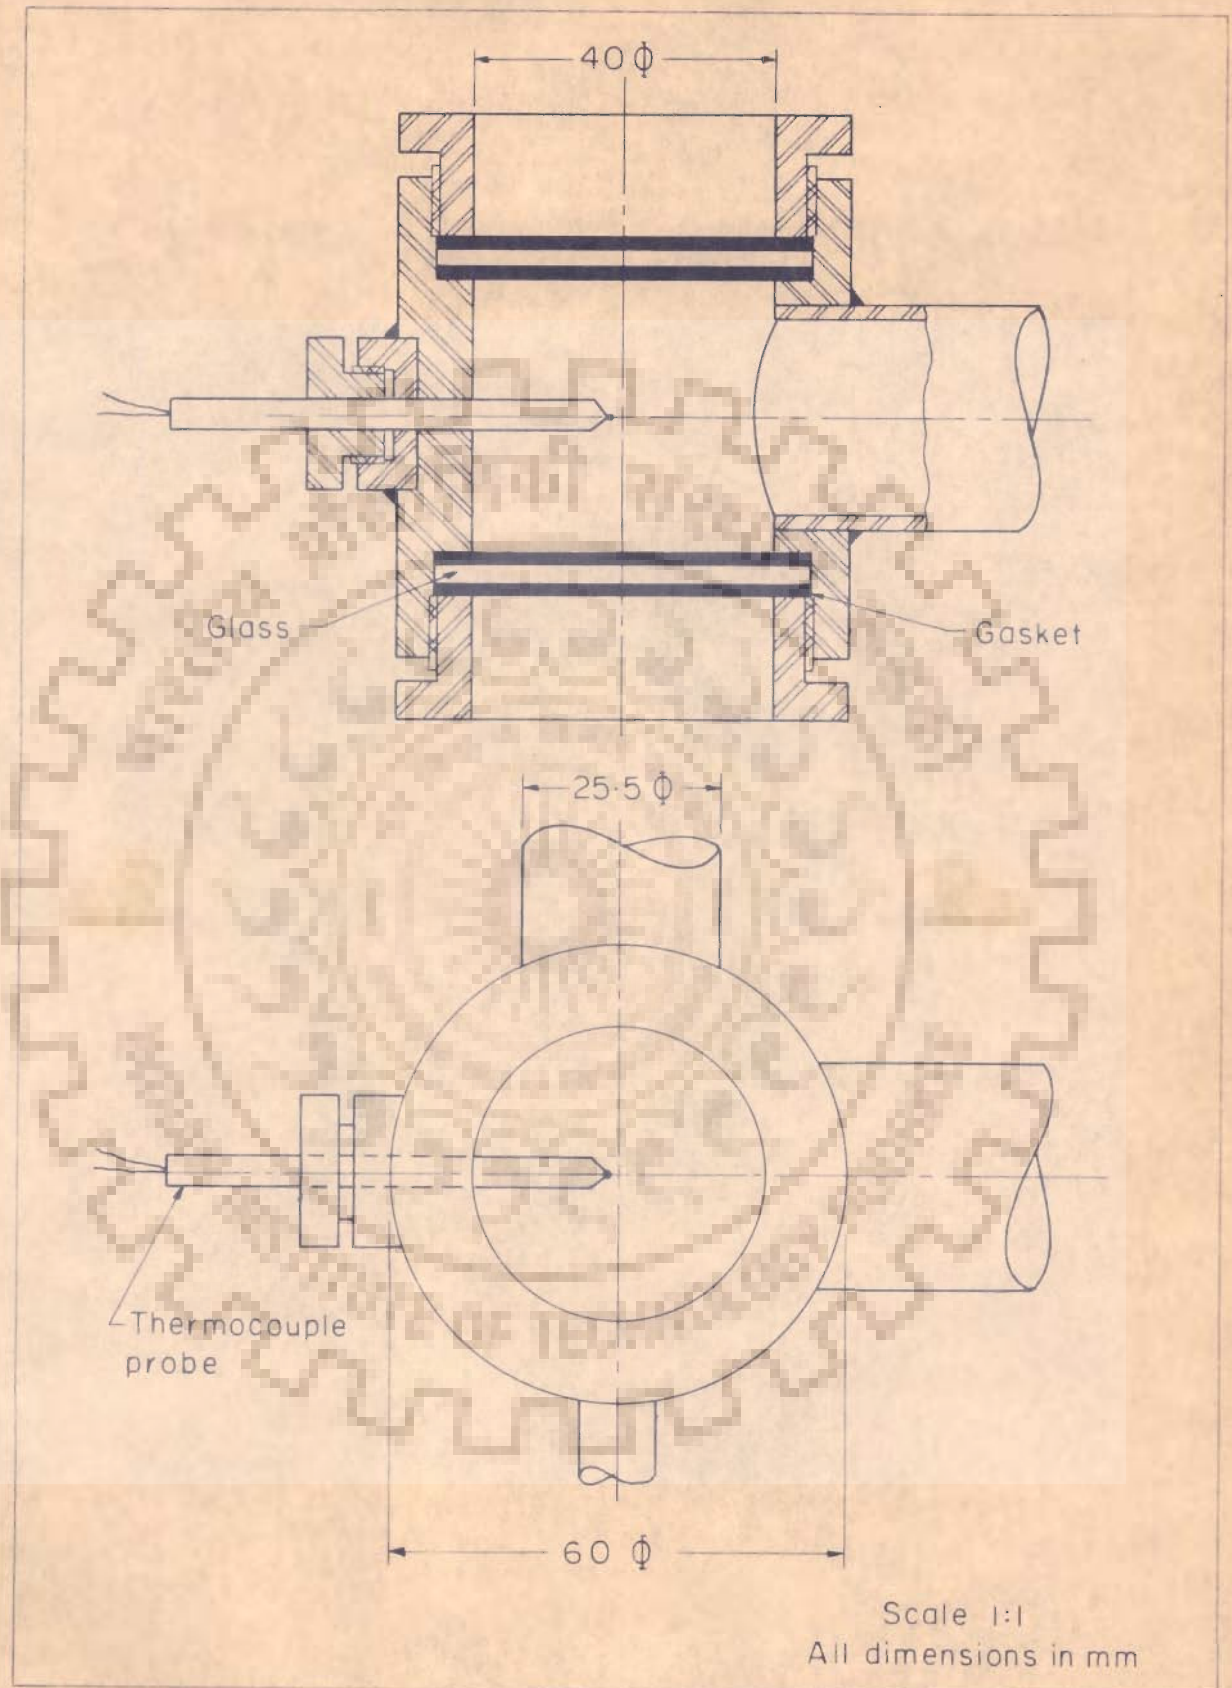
Inlet liquid view port and thermocouple probe assembly
